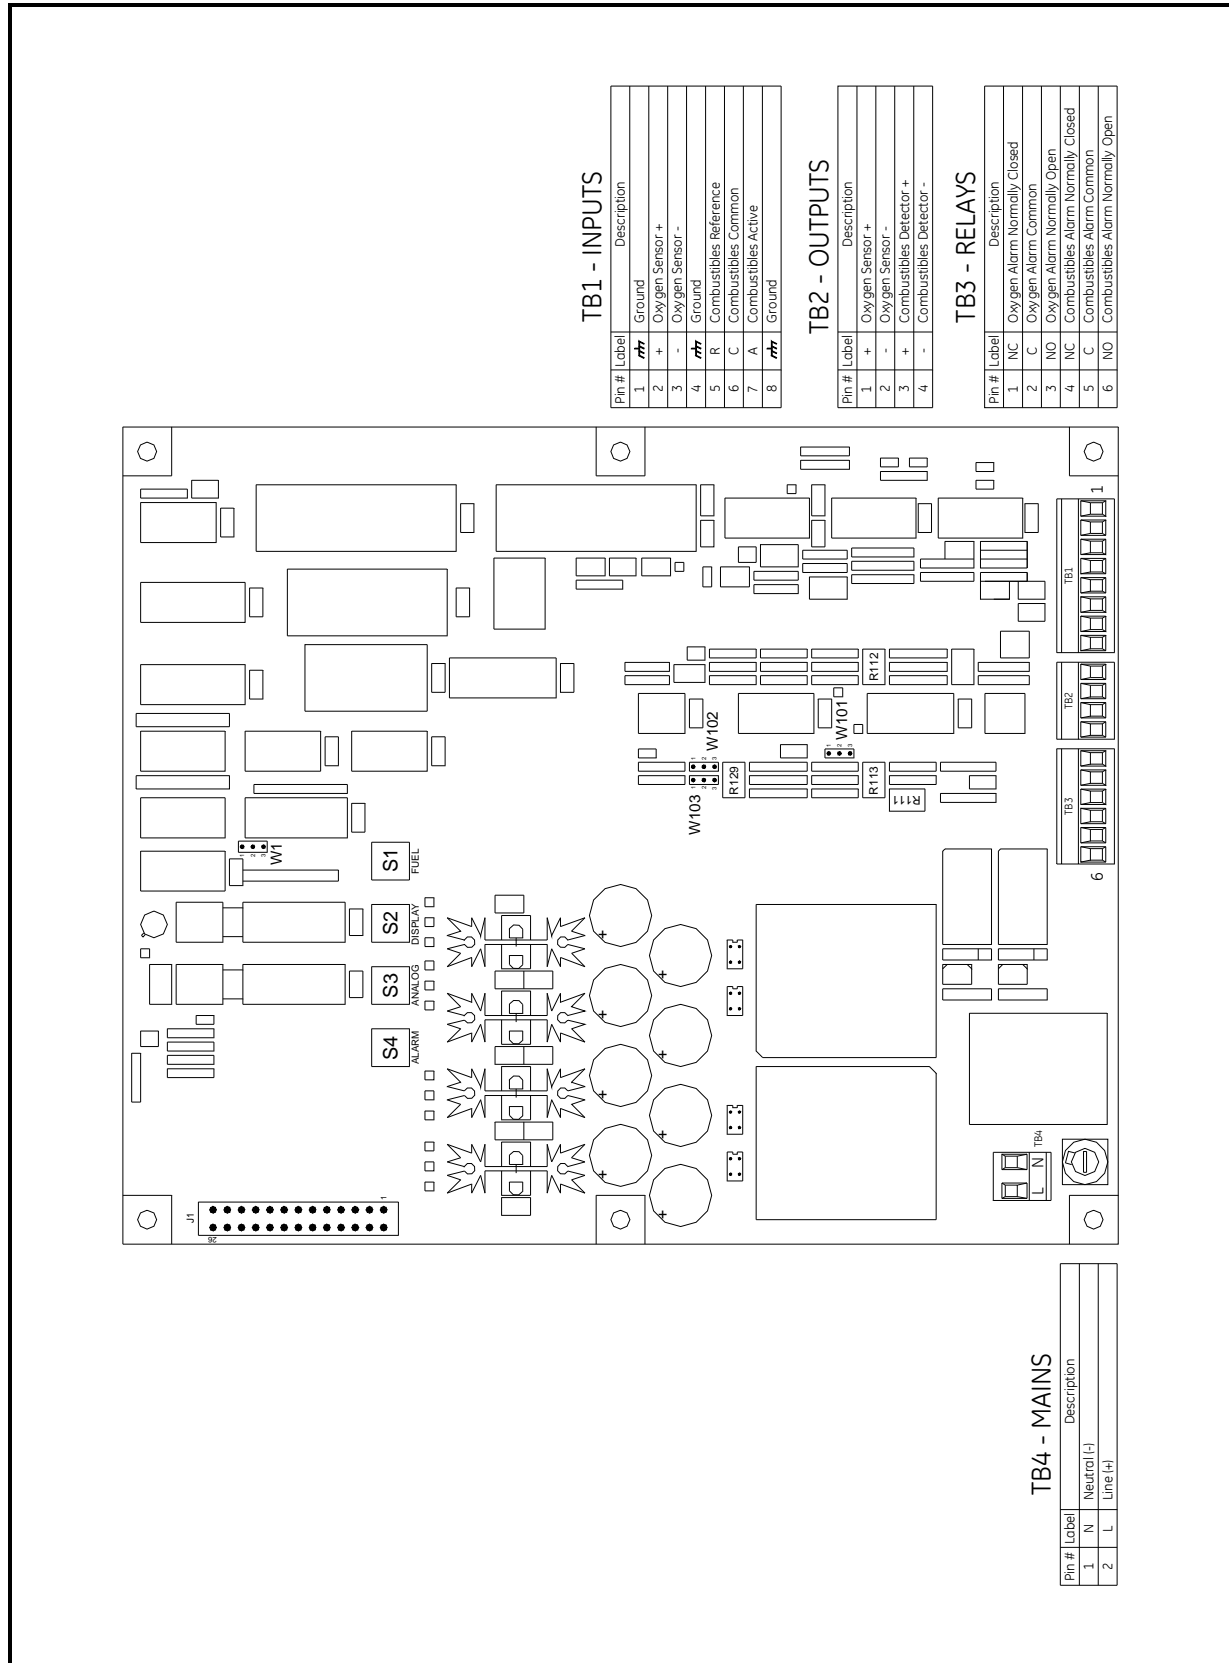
Display Circuit Board - Current (Drawing #1703-011)
